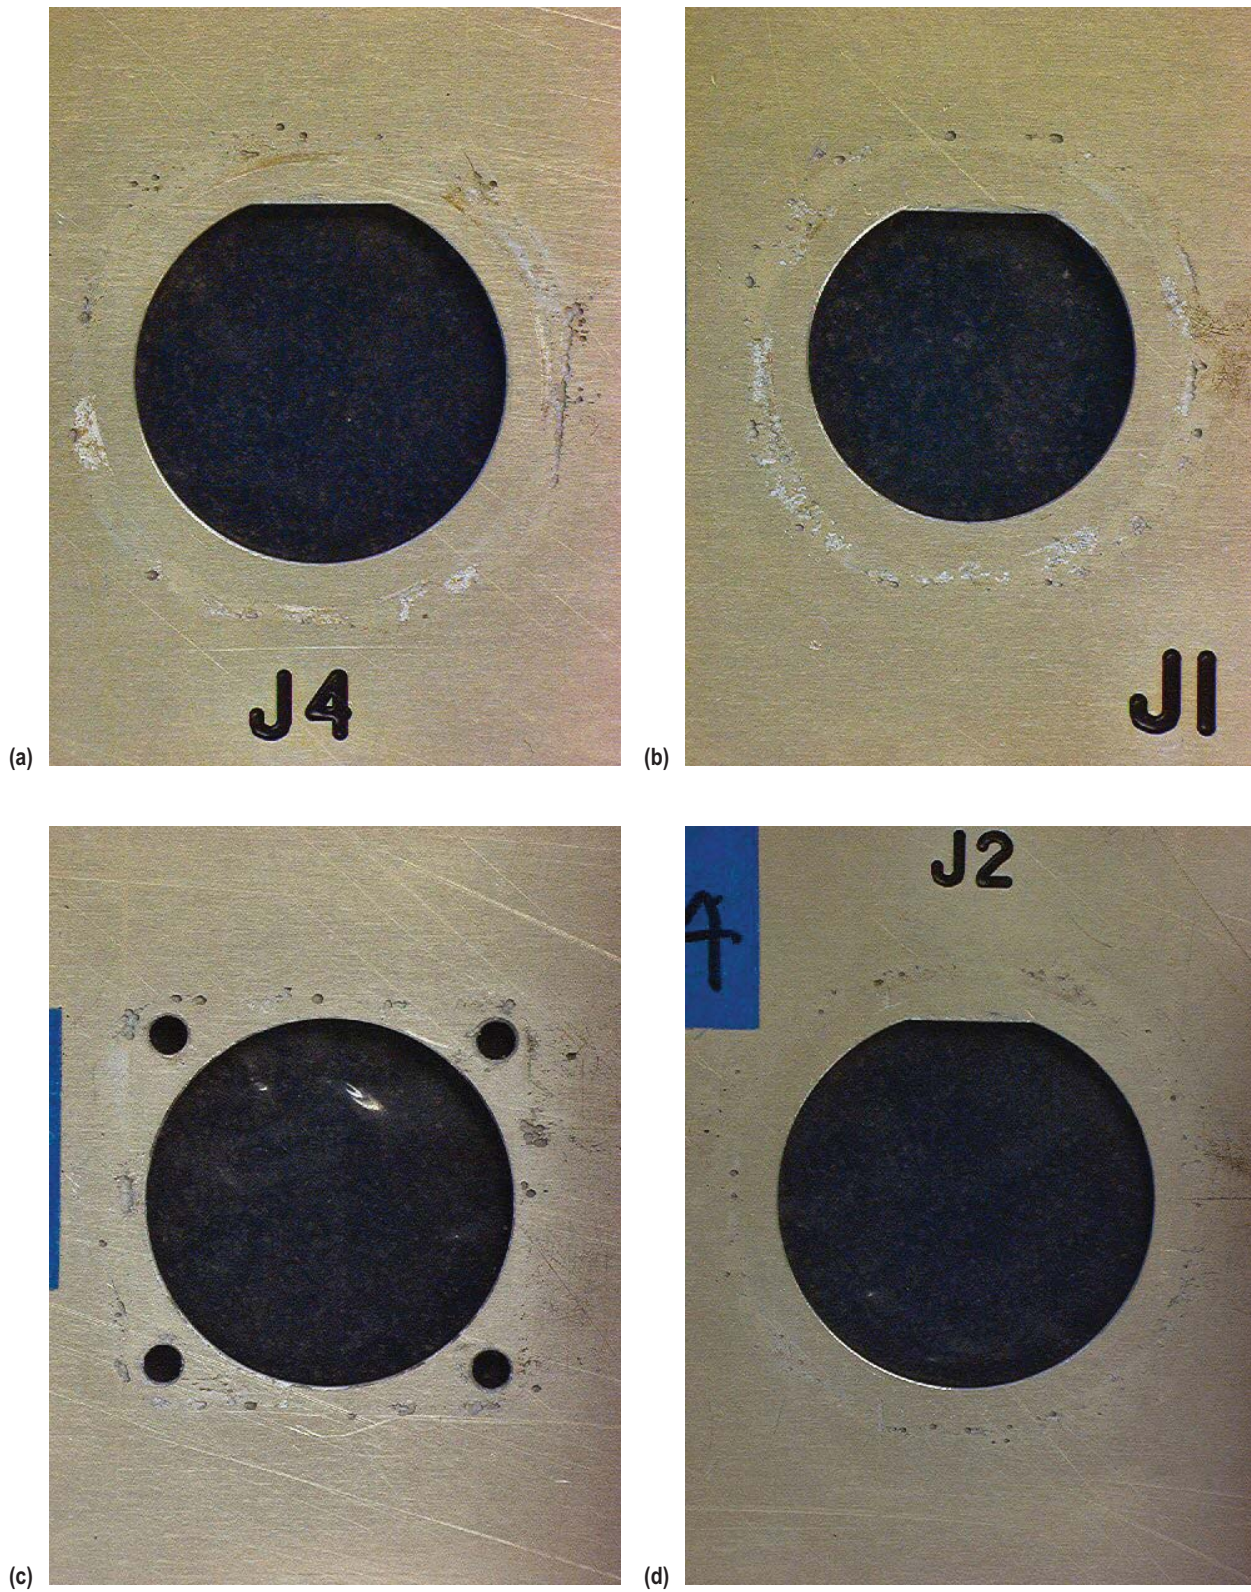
Condition of the receptacle flange side of the alodined bracket. This side exhibited some pitting in the flange contact area which did not affect electrical bonding:
